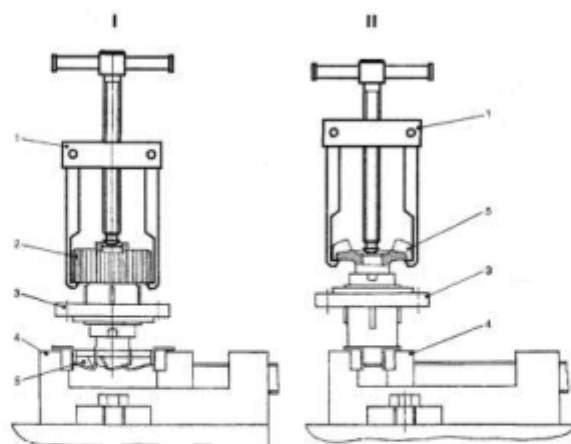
Disassembling the water pump, removing with a puller: I – water pump pulley, II – water pump impeller; 1 – puller, 2 – water pump pulley, 3 – body, 4 – vise, 5 – impeller
